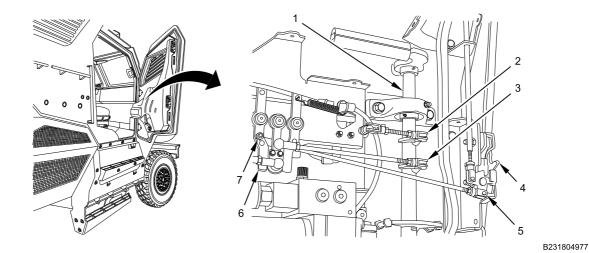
Inner Door Latch Handle Shaft in Neutral Position.
